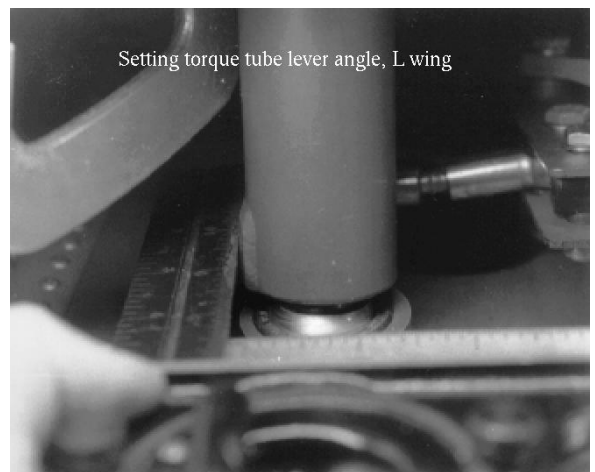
If you measure off the back of the torque tube arm as shown, be sure to account for the fact that this is at a slightly different angle than a line between the tube axis and the pushrod attach point.
